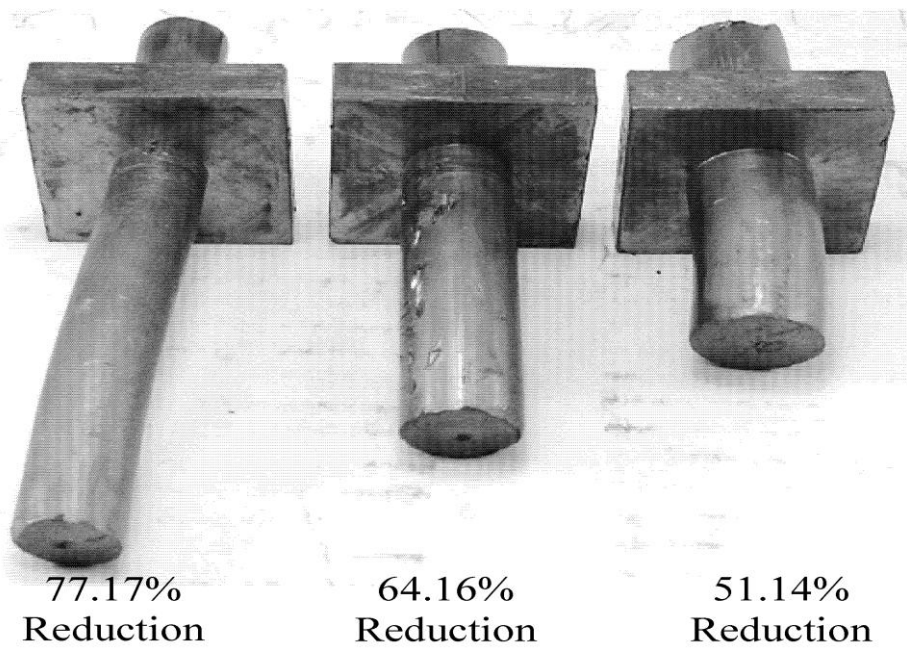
Extruded forward-backward extrusion-forging square head shaped product
